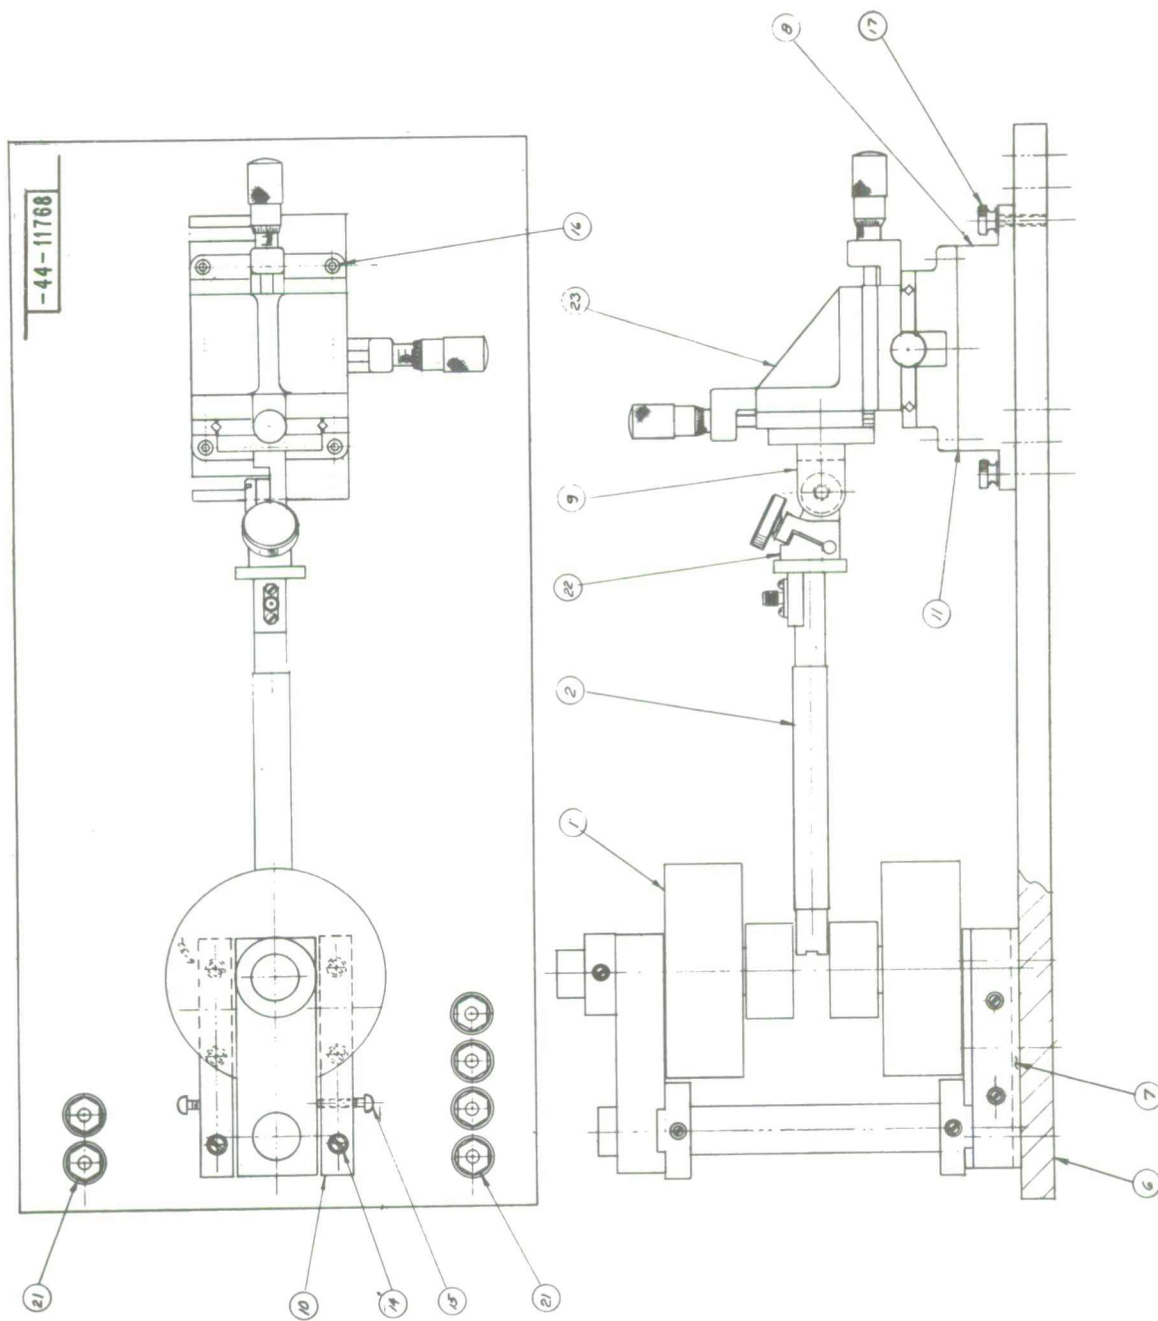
Assembly drawing of magnet and magnetic potentiometer.
